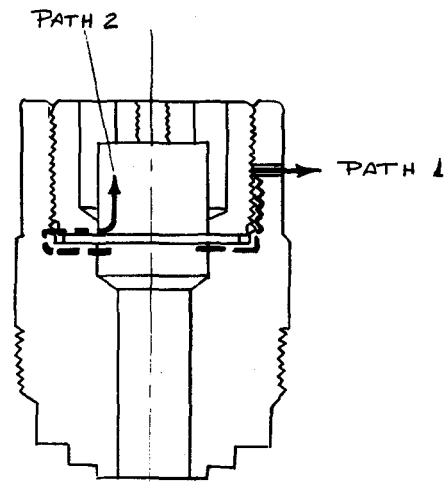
HELIUM MANIFOLD SAFETY DEVICE
